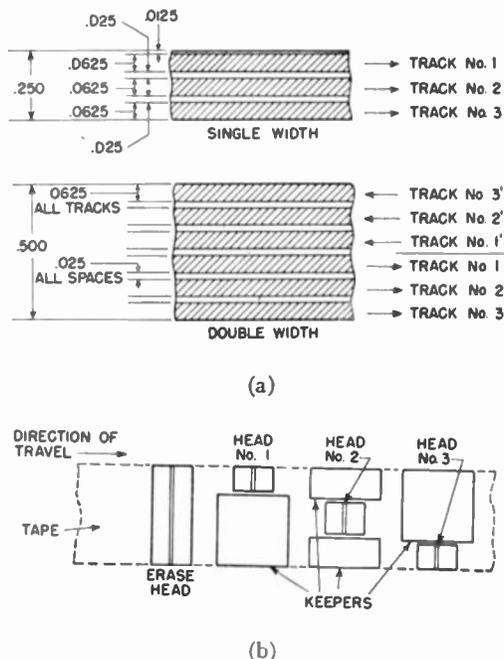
Stereophonic magnetic tape and heads. (a) Tape dimensions. (b) Head arrangement.
